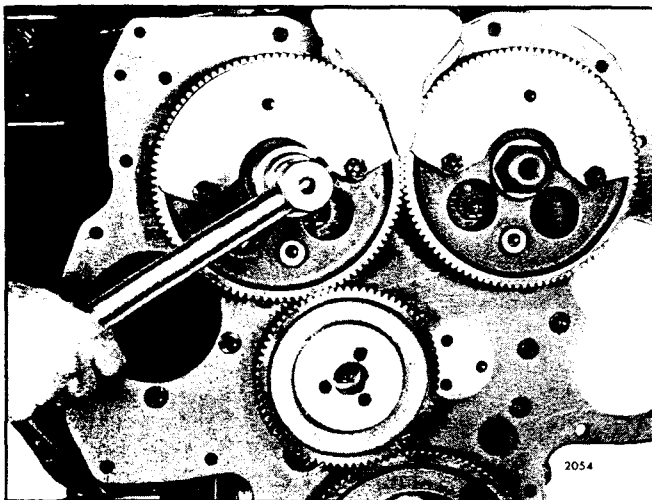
Removing or Installing Nut on Camshaft or Balance Shaft
